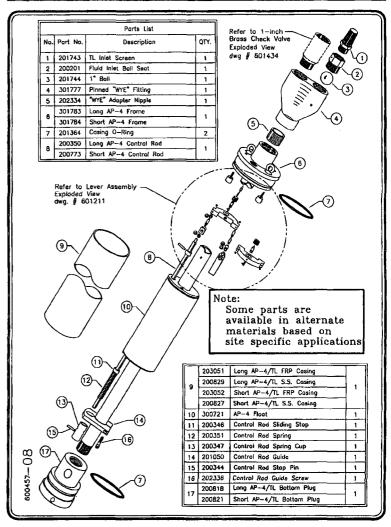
Exploded View of a Top-Loading AutoPump AP-4 (Long & Short)
